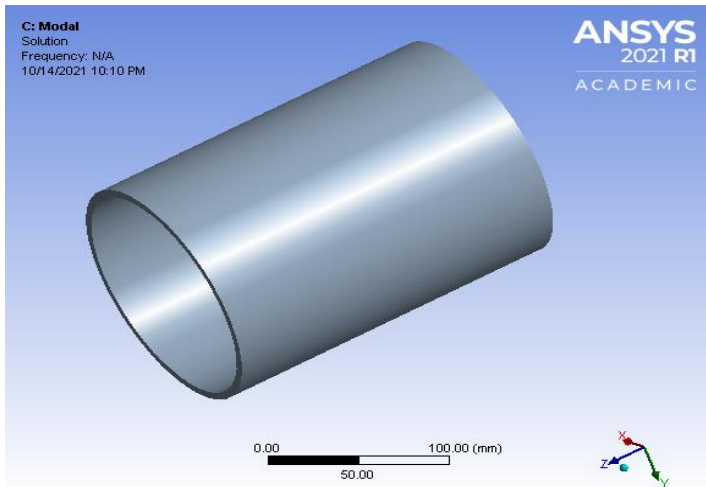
Assembly of Bearing and Lubrication For Eccentricity 0.2
